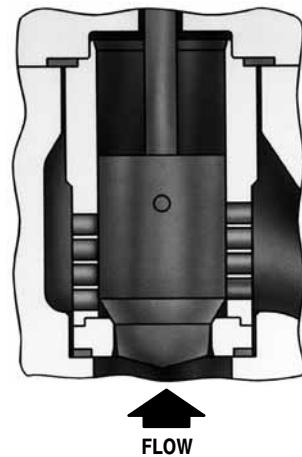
Design HPS Trim with Micro-Form Valve Plug
